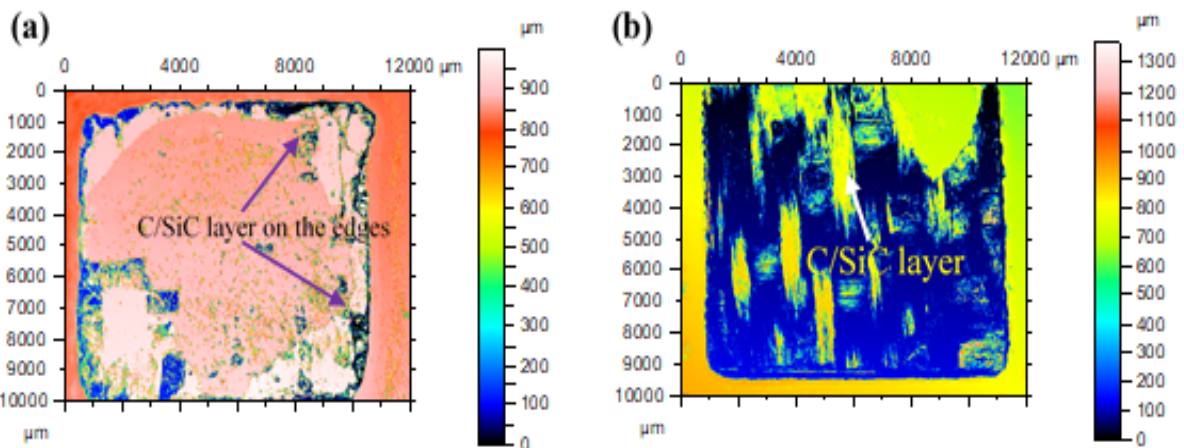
Optical profilometer image of the fracture surface of (a) Ticusil and (b) Cusil-based joints.
